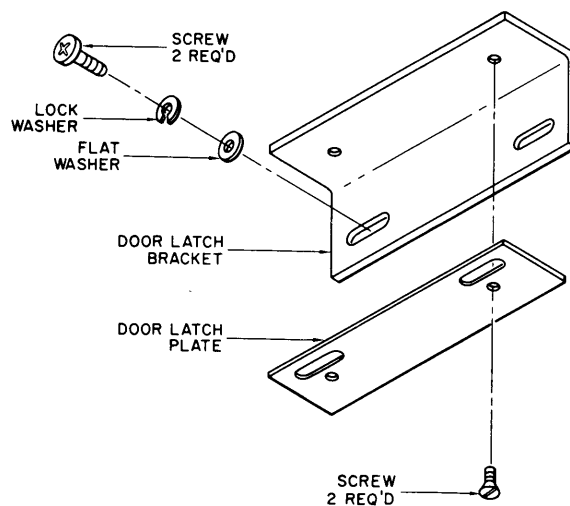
Door Latch Plates and Brackets, Installation Diagram.
